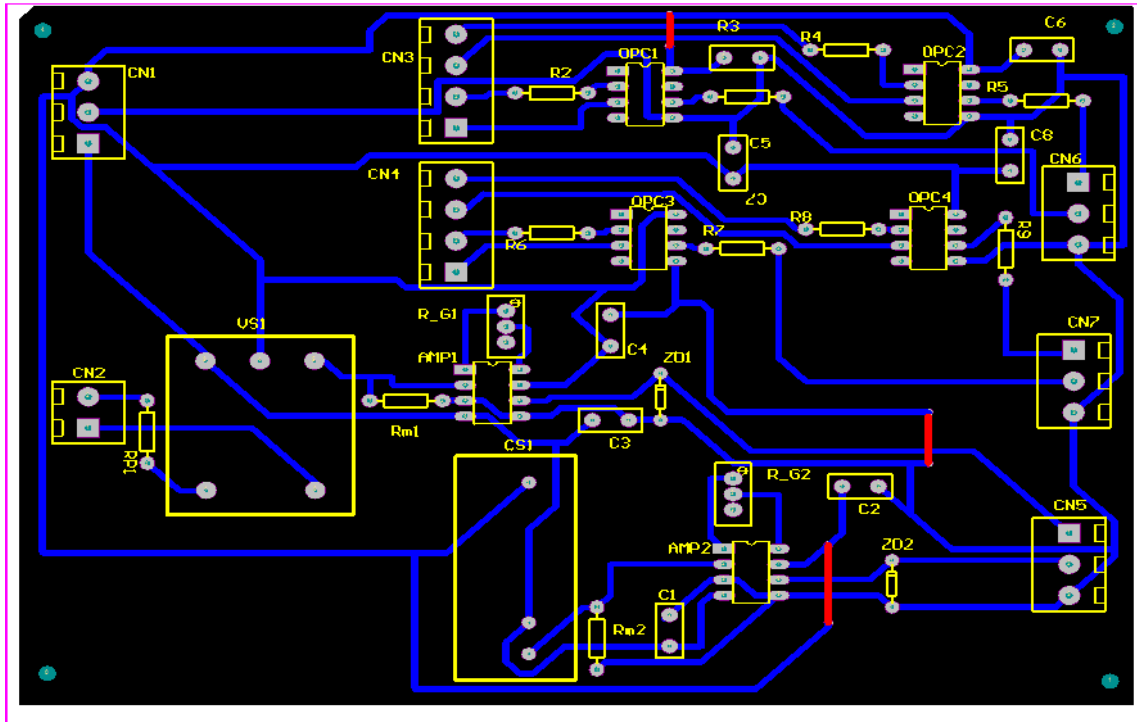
PCB layout drawing in Altium Designer of the sensor board for the inverter.
